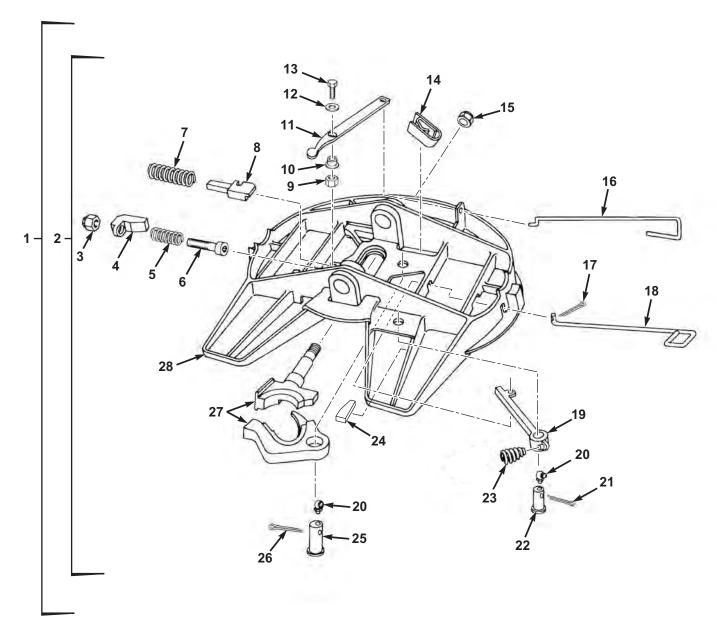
FIFTH WHEEL - 3.5 INCH KING PIN - M983A2 LET (Sheet 1 of 2)
